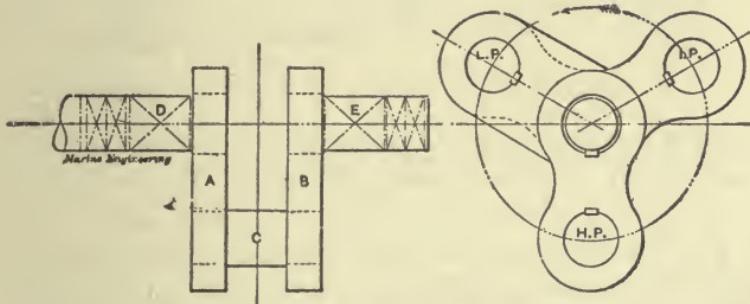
SECTION OF BUILT-UP CRANKSHAFT
